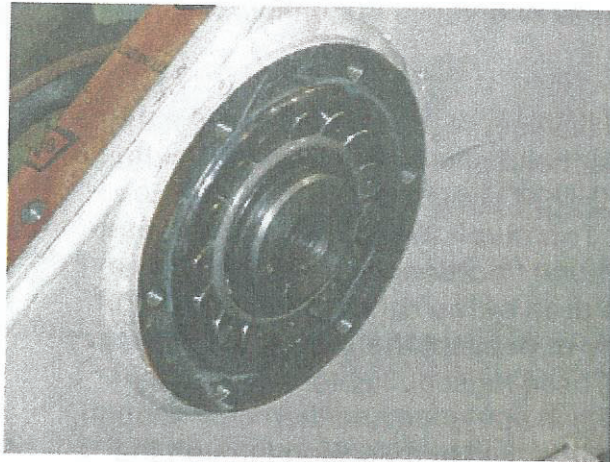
Showing the puller hole in the end of the eccentric sprocket shaft. The tube used with the puller must clear the outside diameter of the bearing.
